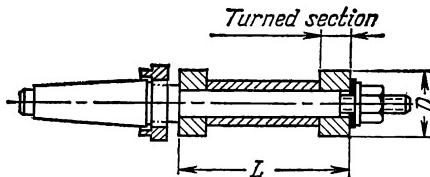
Built-up test mandrel designed in the Orgstankinprom Process Engineering Institute
